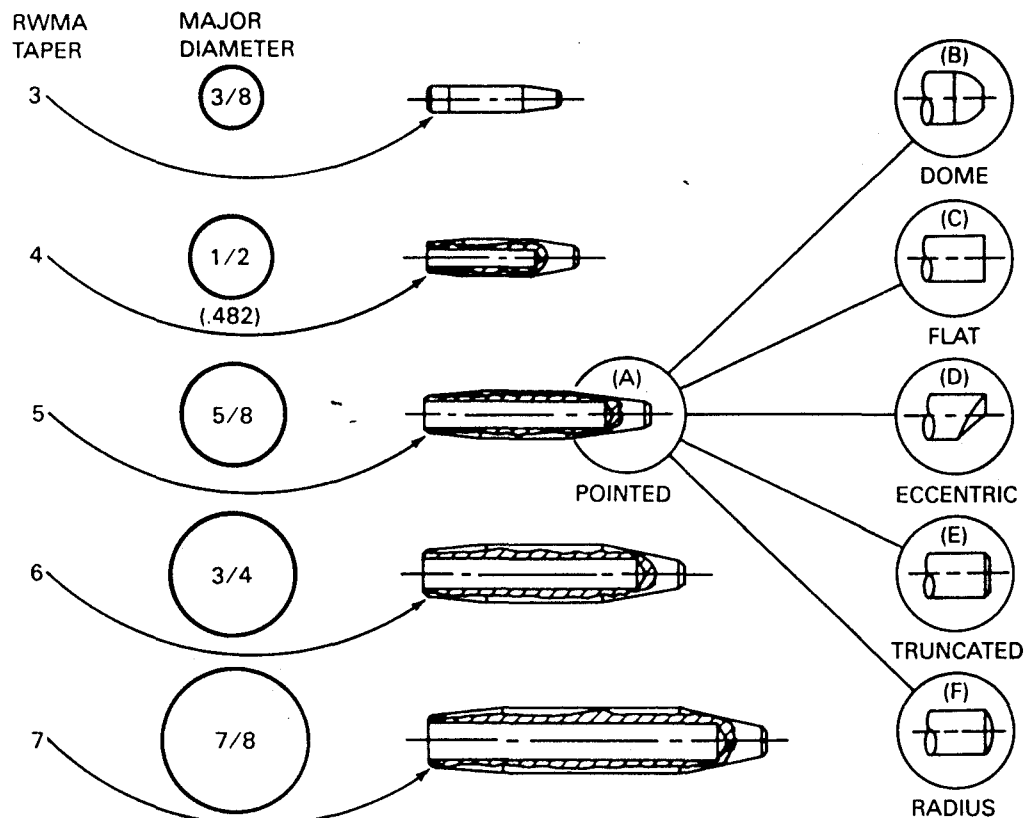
Standard RWMA Spot Welding Electrode Face and Taper Designs
